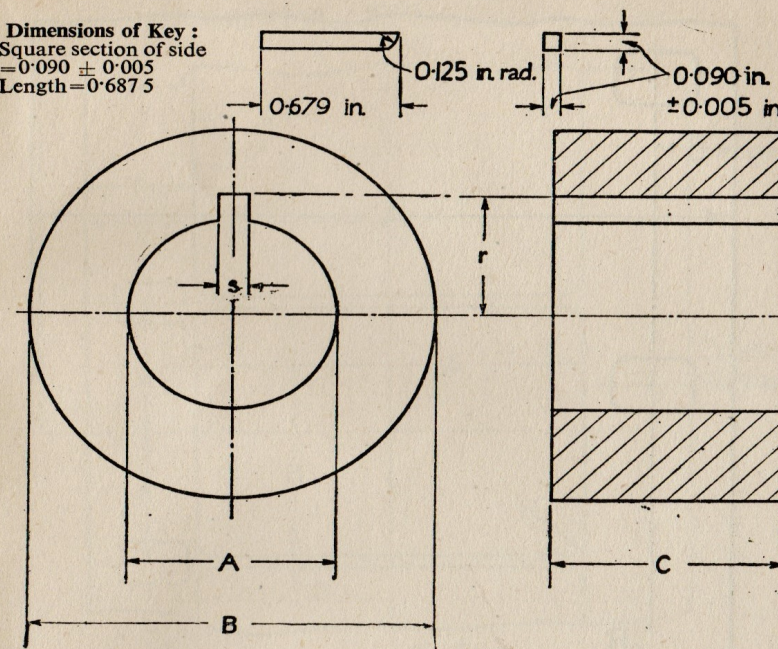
Dimensions of cores for 35 mm. negative and positive stock.
